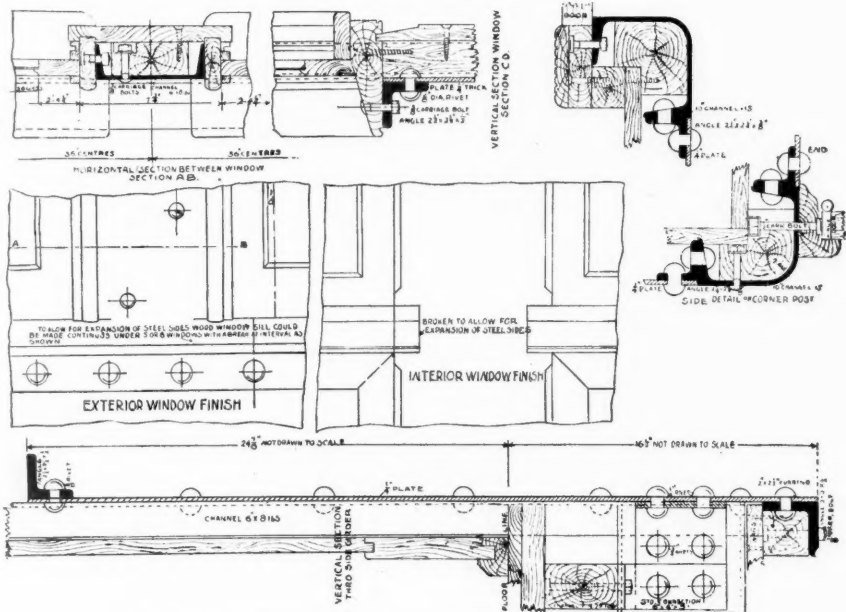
Plate Girder, Side Sill and Channel Iron Posts.
